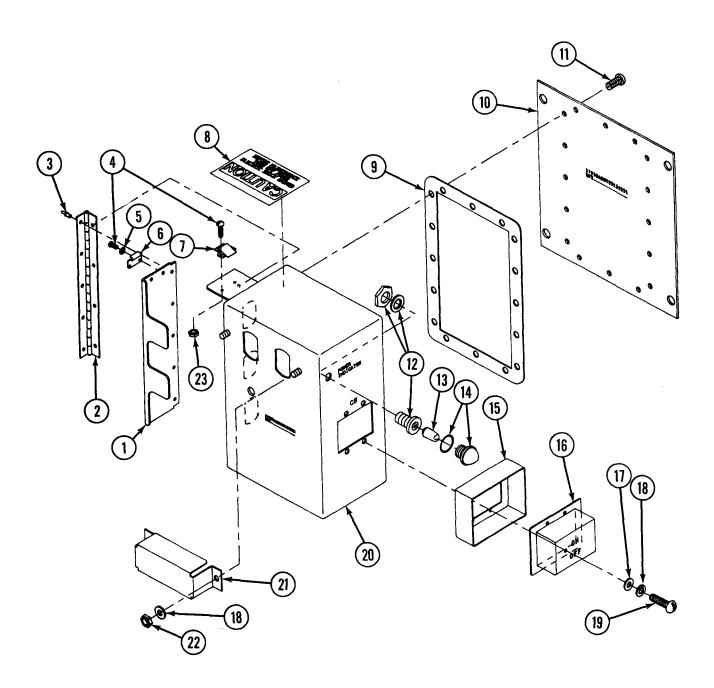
Power Interface Box Assembly (sheet 1 of 2)
